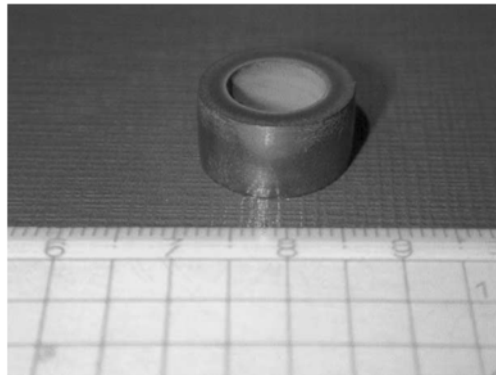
Mullite/Mo FG cylinder by centrifugal molding technique [107]
